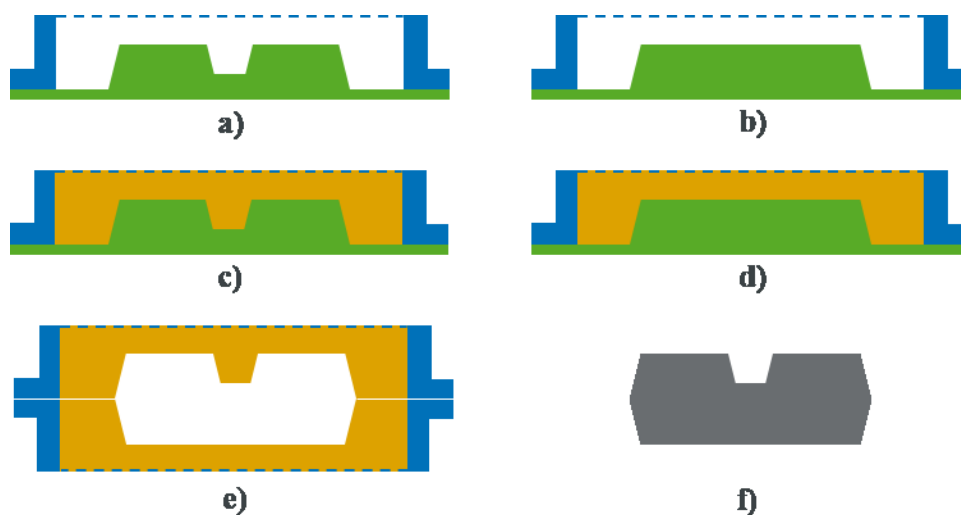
Sand casting process. A) first half of the pattern in a flask, b) second half of the pattern, c) first half of the mould, d) second half of the mould, e) assembled mould, f) solid casting.
